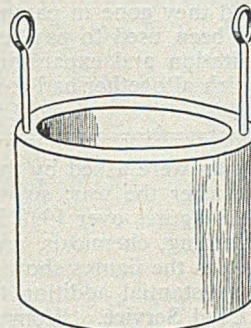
Bush Pattern prepared by inserting Lifting Screws and Lined with Cardboard to give Easy Stripping.
